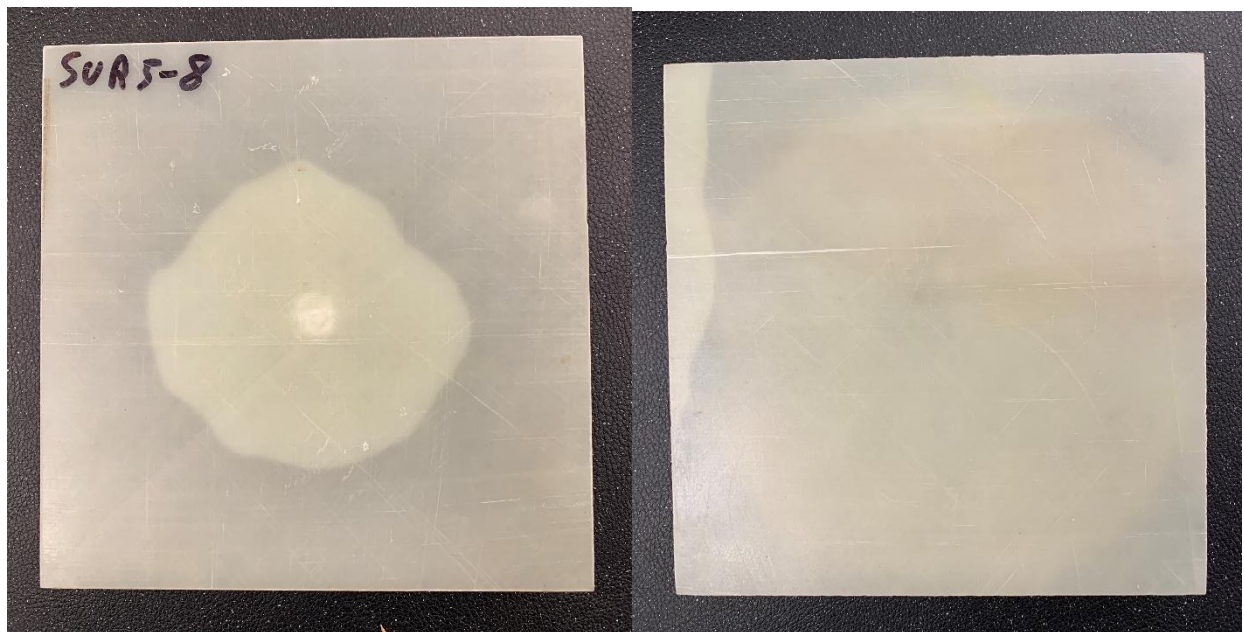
Typical delamination of specimens manufactured with EAA resin on the front face (left) and the back face (right).
